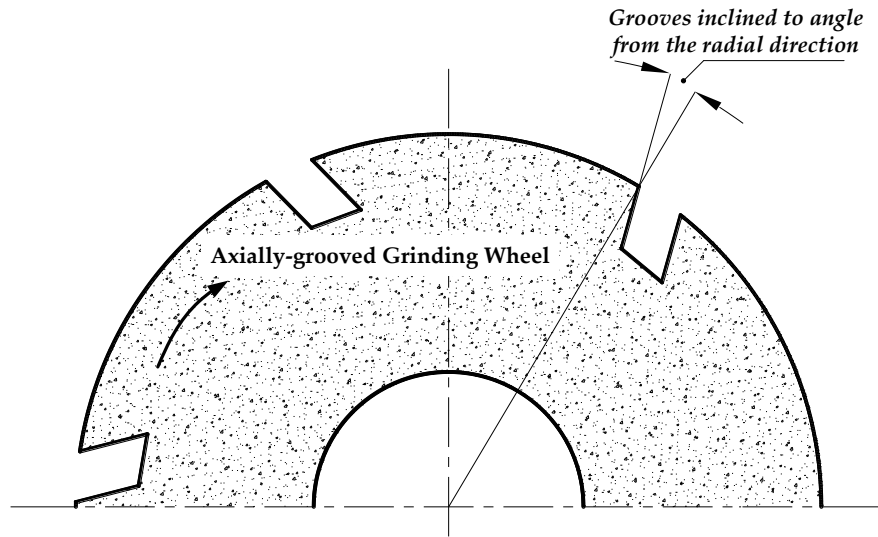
Schematic drawing of the grooved wheel used by Kwak and Ha [36]
